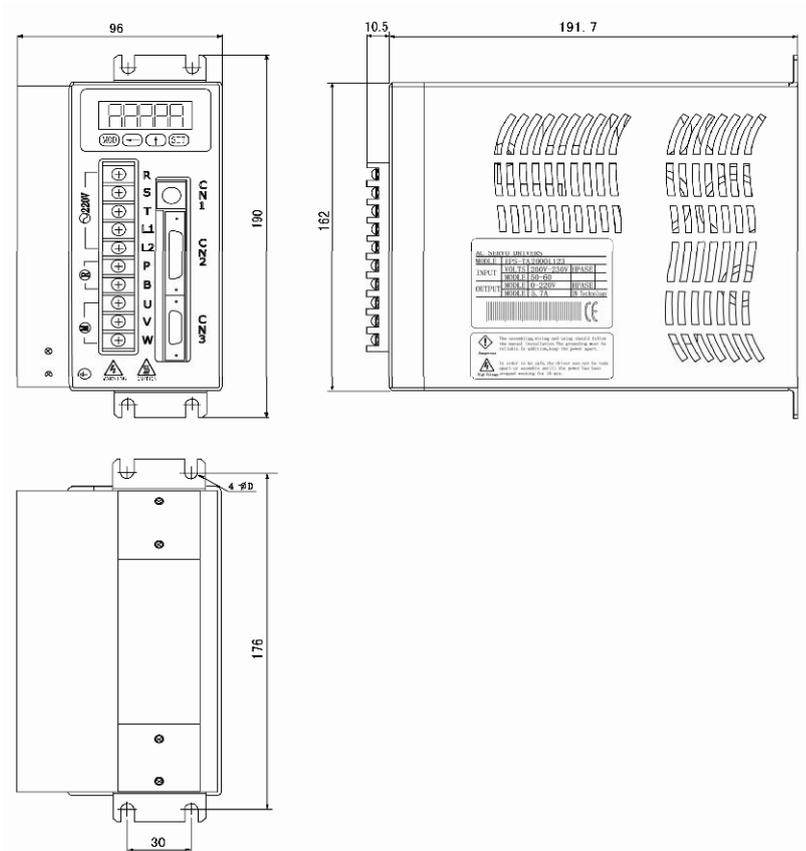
EPS1—300 servo motor driver dimensions (Unit: mm)
